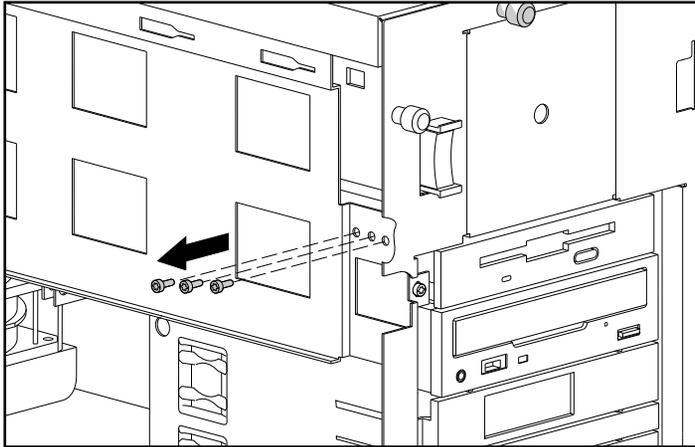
Removing Three Security Screws from Front Left Side of Chassis
